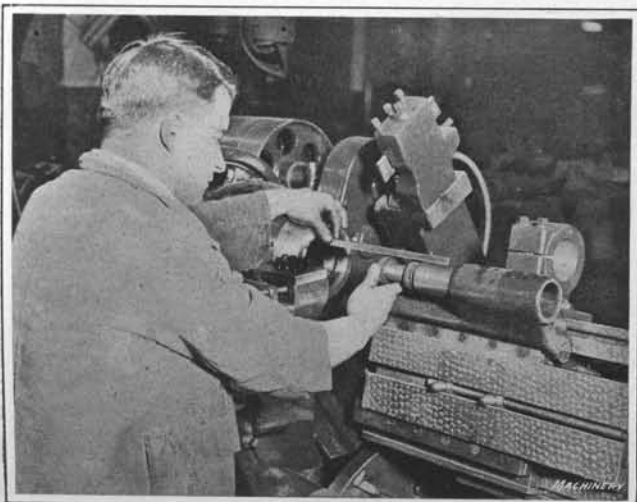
Setting Turning Tool Relative to Spindle Nose
